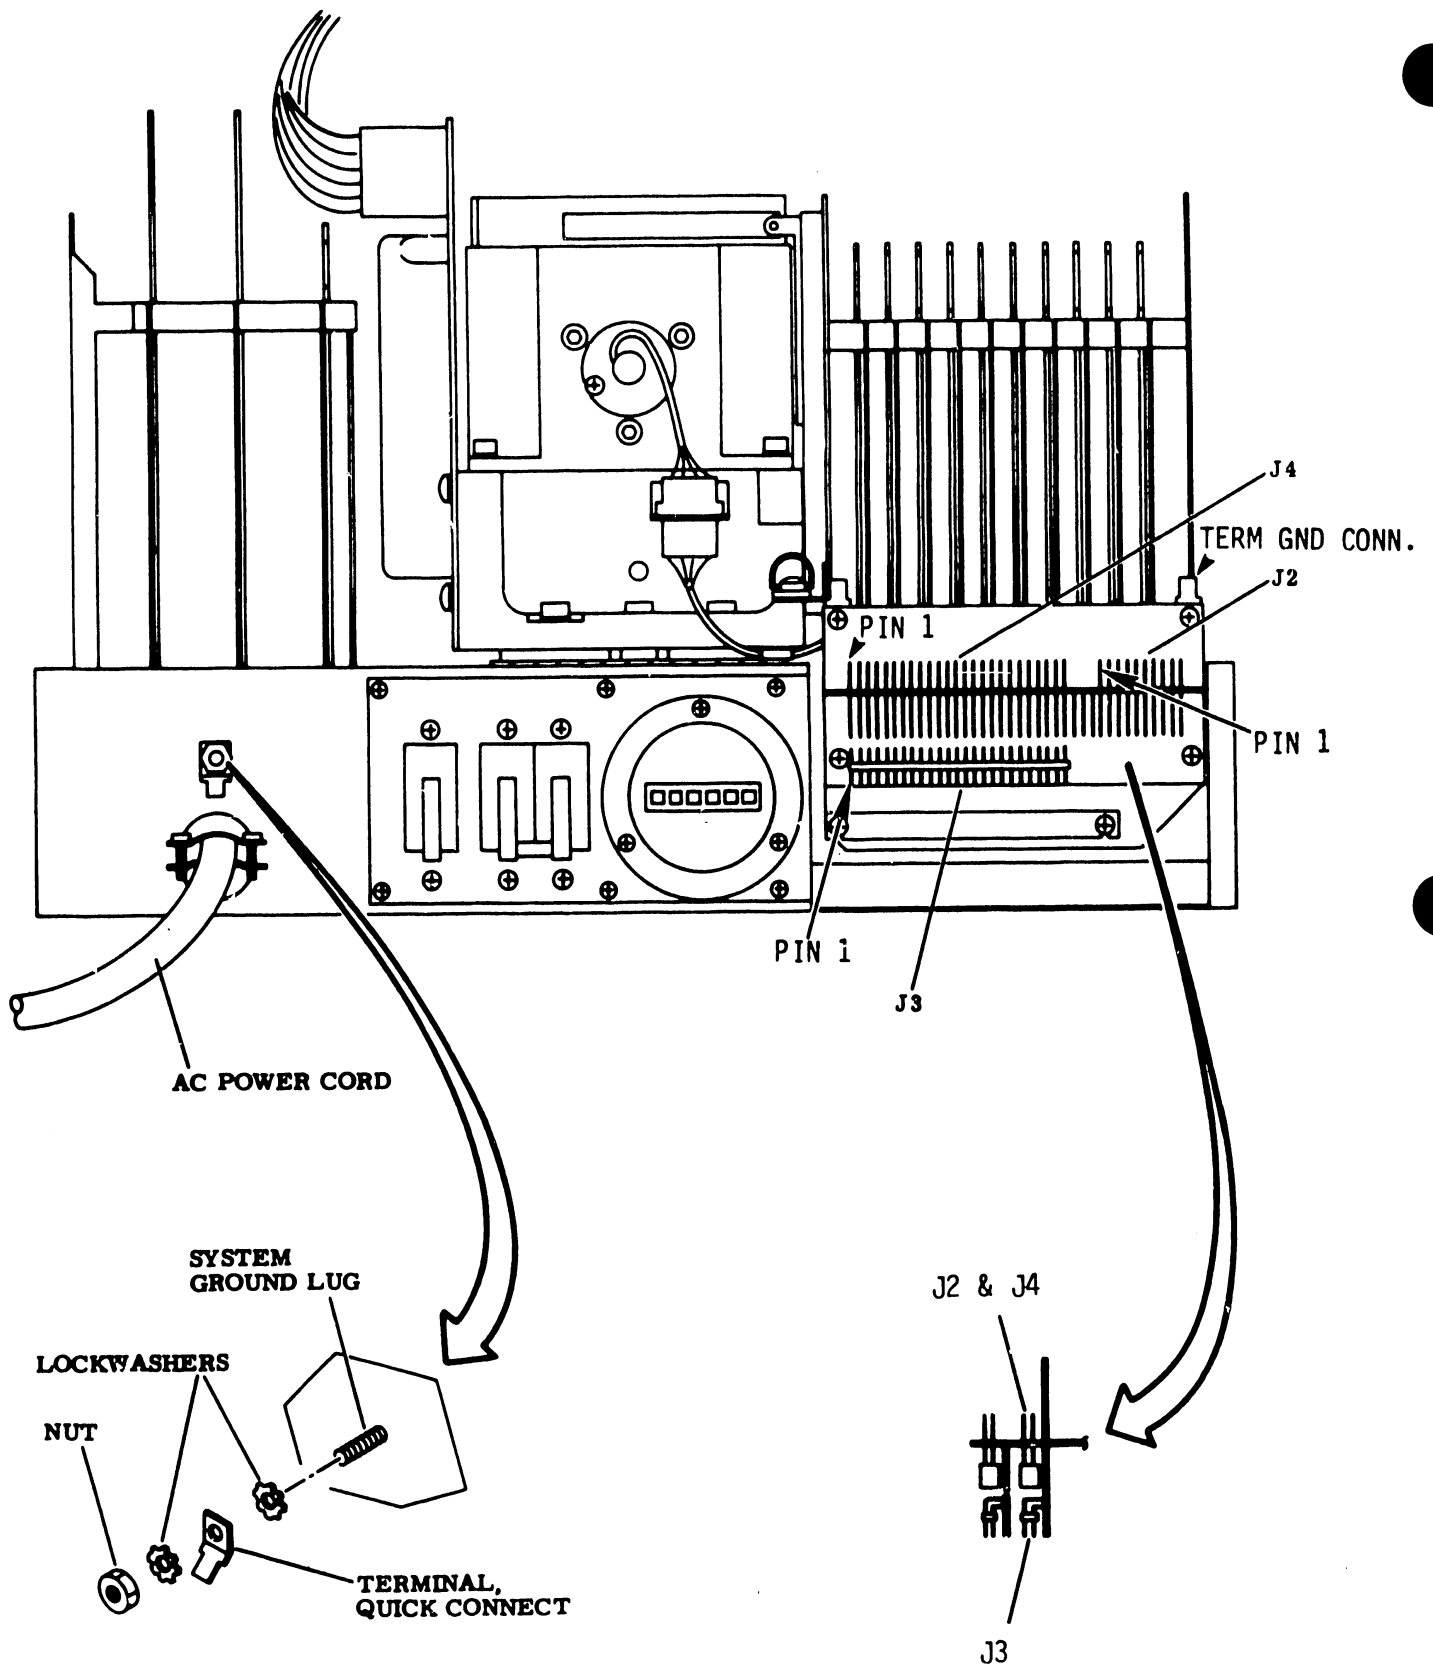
CABLE INSTALLATION - PARTS LOCATION VIEW
